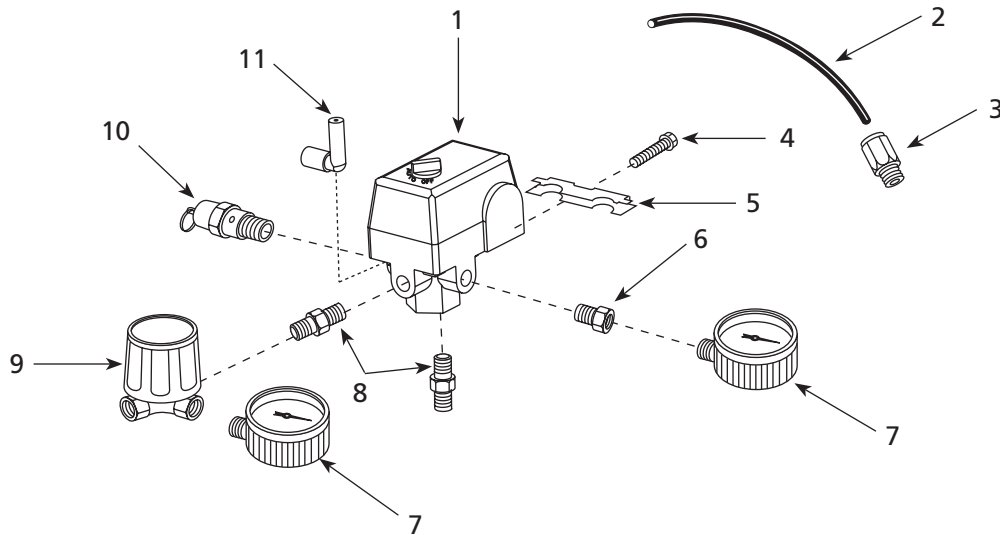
Replacement Parts Illustration for Pressure Switch Assembly for Portable Air Compressors
